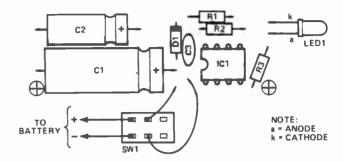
Component overlay for the transmitter. Left: A tight squeeze but it will all fit in!
